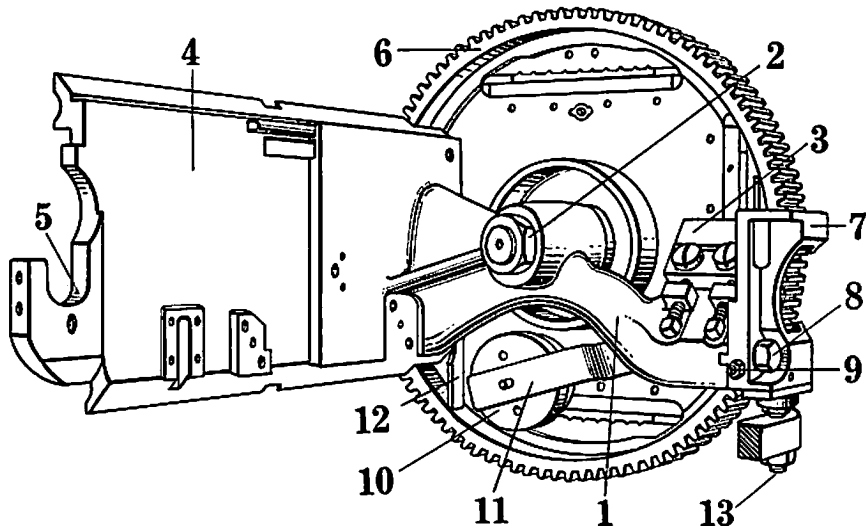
Showing how an Intertype mold cap is removed when the liners are being changed. All parts of the mold are completely accessible for cleaning before new liners are inserted.
